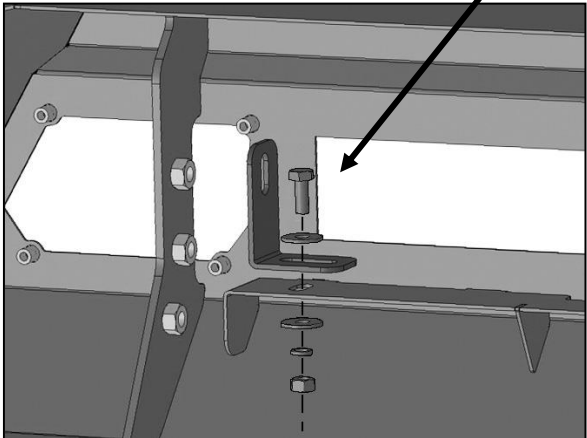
Insert Rectangular Spacer between Bracket and frame crossmember
